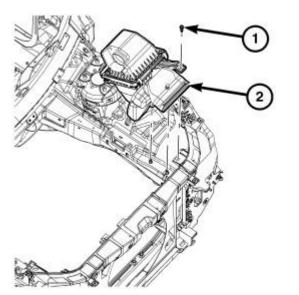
Retainer From Bracket Courtesy of CHRYSLER LLC
